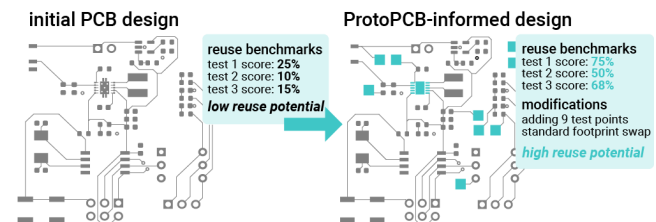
ProtoPCB can be used to benchmark PCB designs for reusability by testing how many other input circuits (as part of a benchmarking suite, for example) could be implemented on this version of the PCB. In this example, after running ProtoPCB on a benchmarking suite, our user sees low scores indicating a low reuse potential and makes simple modifications (e.g., adding test points or using a more standard footprint). Now, this new design scores on this reusability benchmark.
